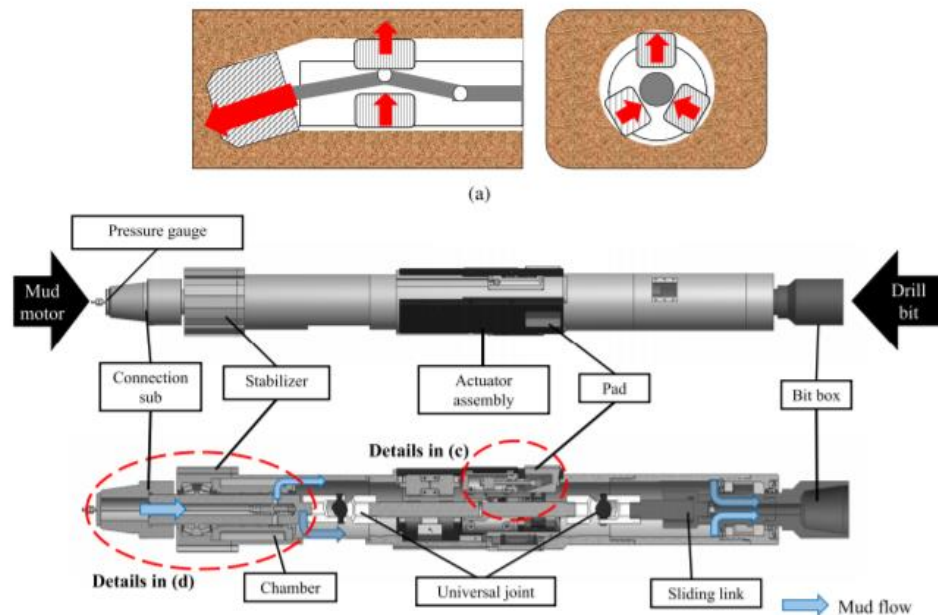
A horizontal boring machine with real-time speed adjustment [43]
